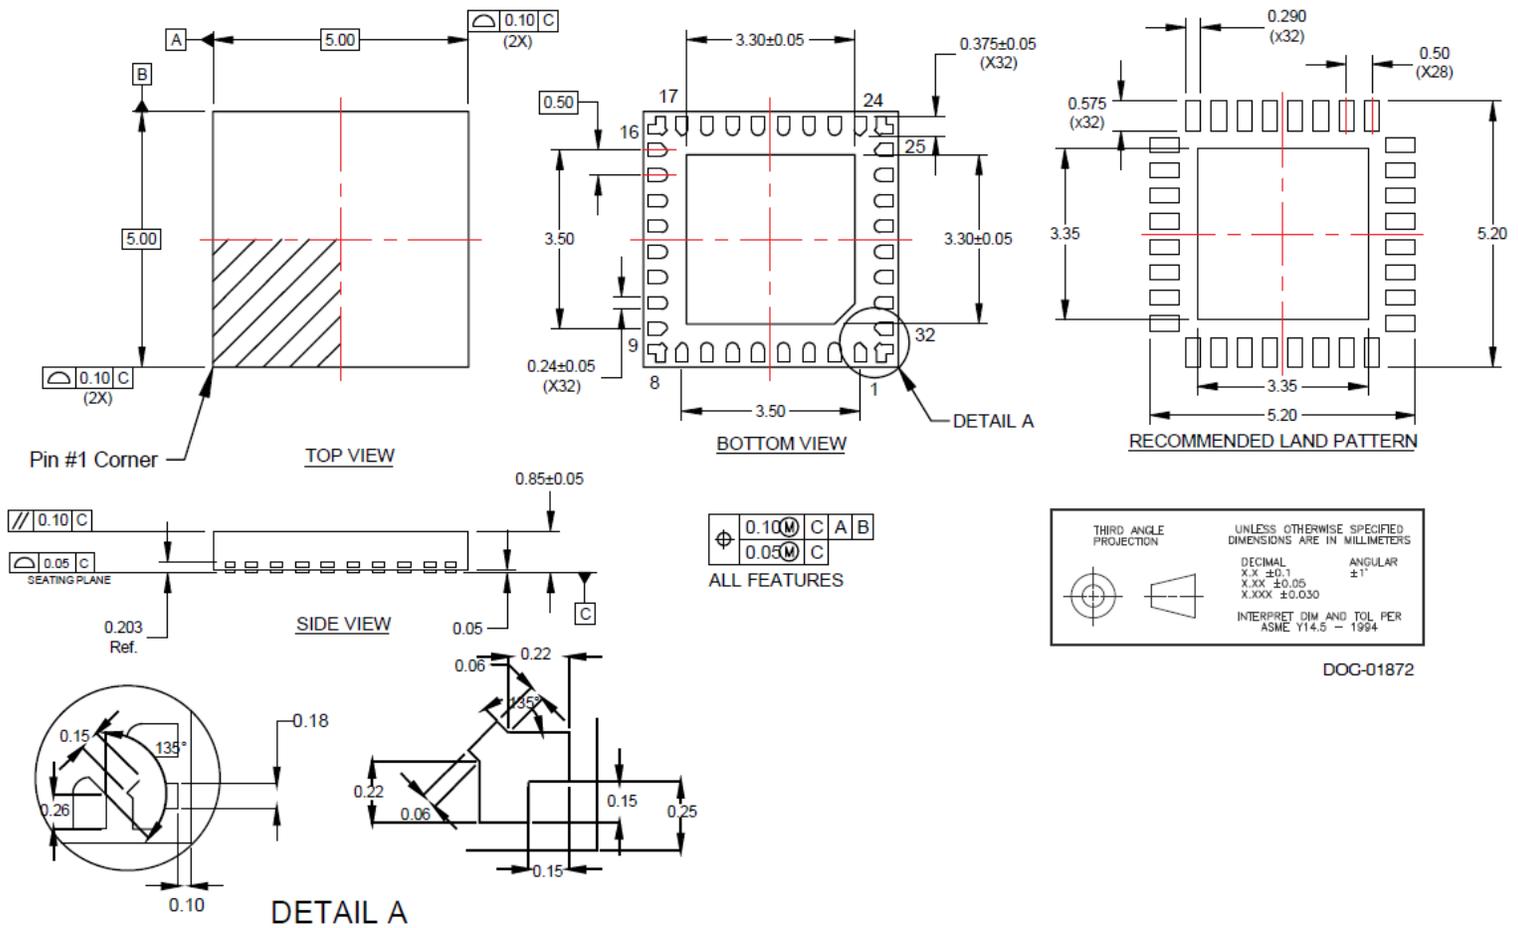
Package mechanical drawing for the 32-lead 5 × 5 mm QFN package
